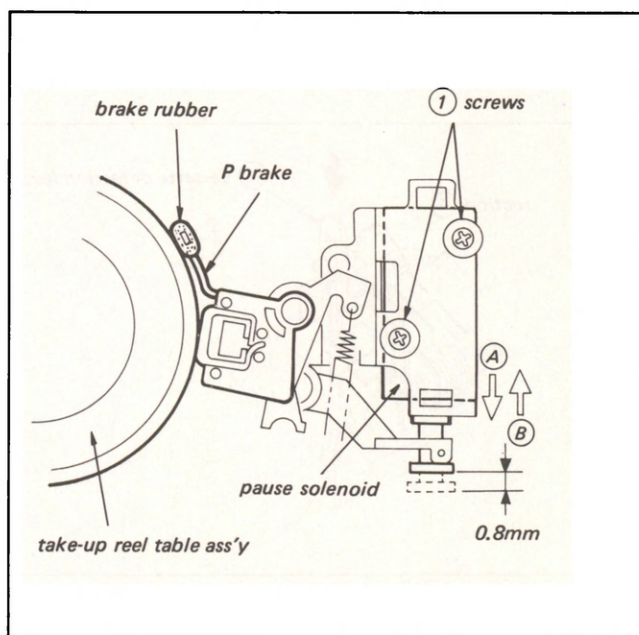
Position adjustment of pause solenoid (Stroke adjustment)
